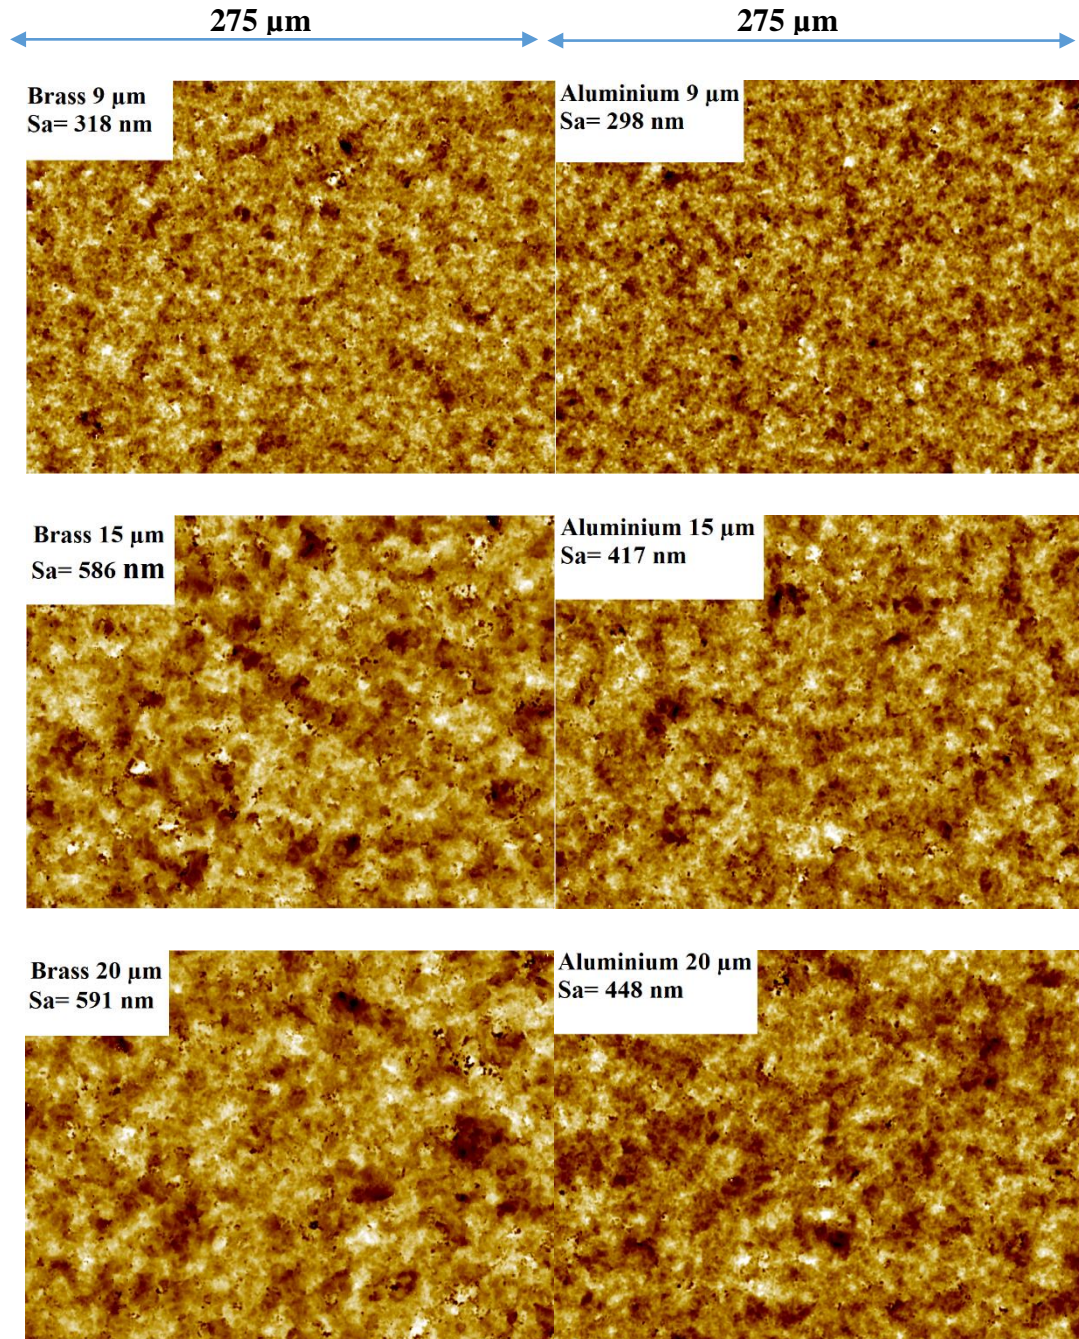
Surface texture of the workpiece surface after grolishing by brass and aluminium tools with different abrasive of 9µm, 15µm and 20µm (shown with the same scale).
